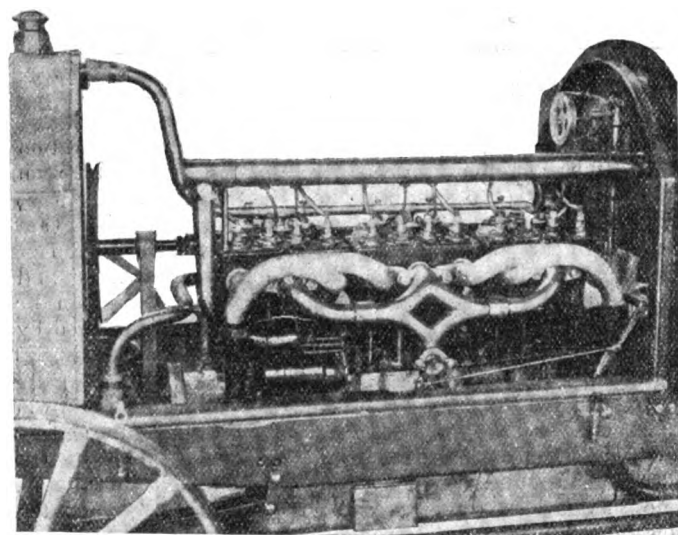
The Darracq 40-h.p. Six-Cylinder Engine.
